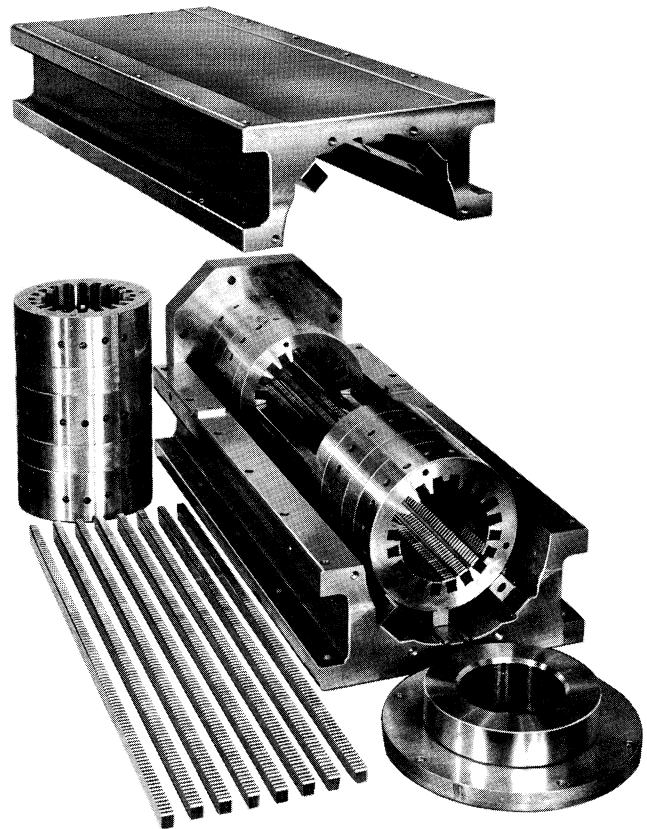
Stick-type Red Ring pot broaching tools disassembled to show construction.
